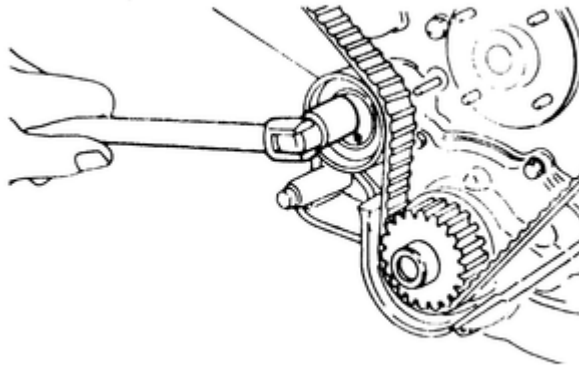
Make sure that everything is properly aligned before removing the timing belt — 6-cylinder engines
